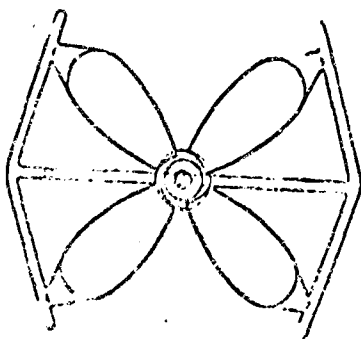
Casting scheme of a system for pouring a narrow-bladed propeller weighing over 4 tons.
